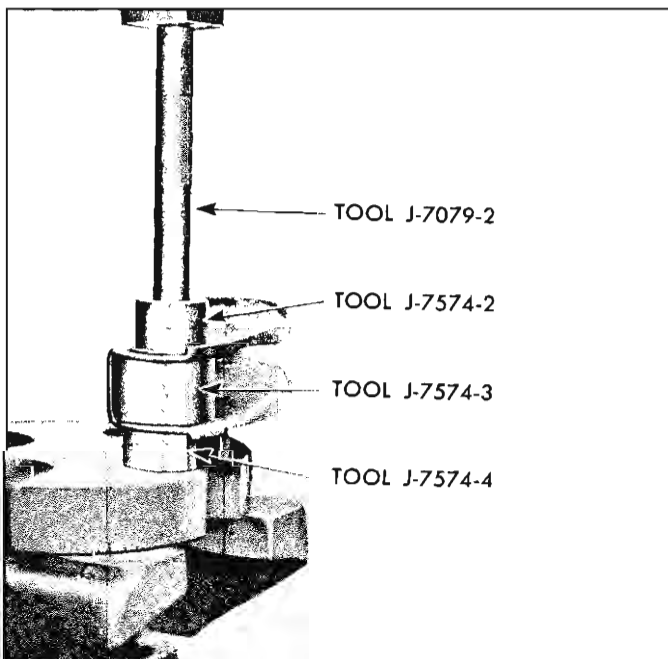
Installing Upper Control Arm Bushings (Front Bushing Shown)
